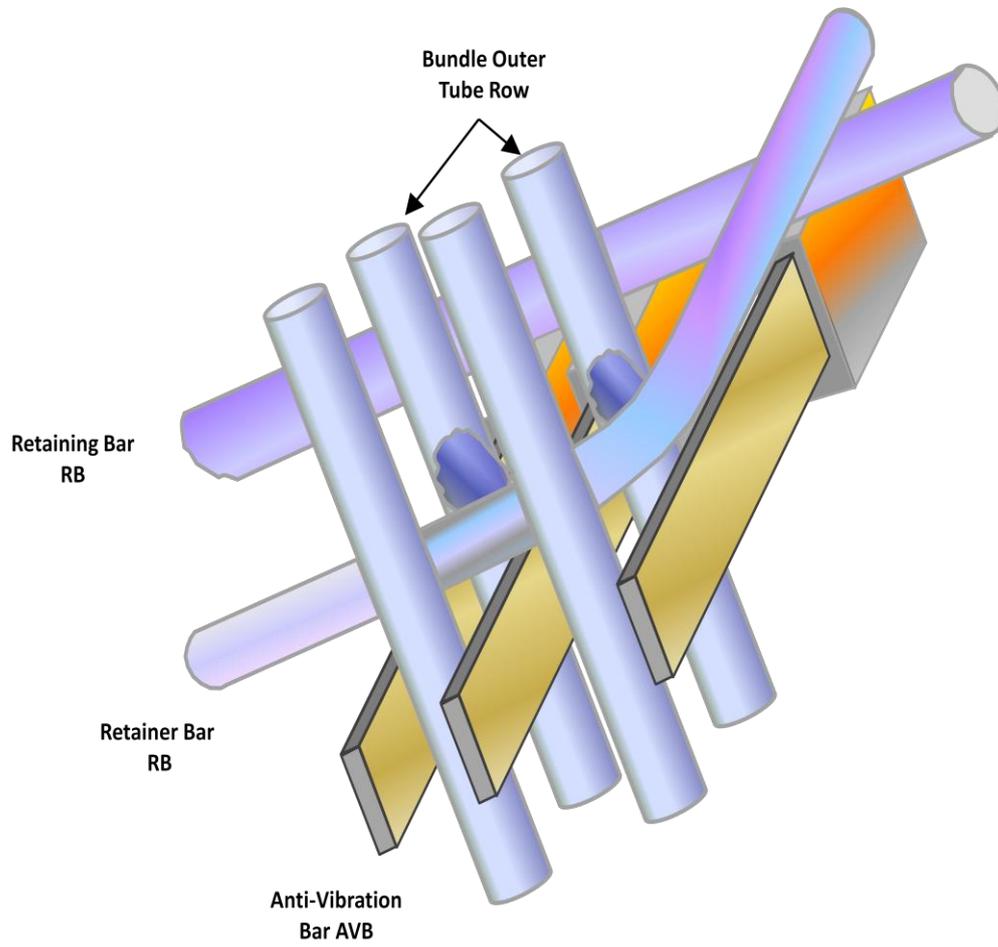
C AVB ASSEMBLY RETAINER BAR-TO-TUBE WEAR
